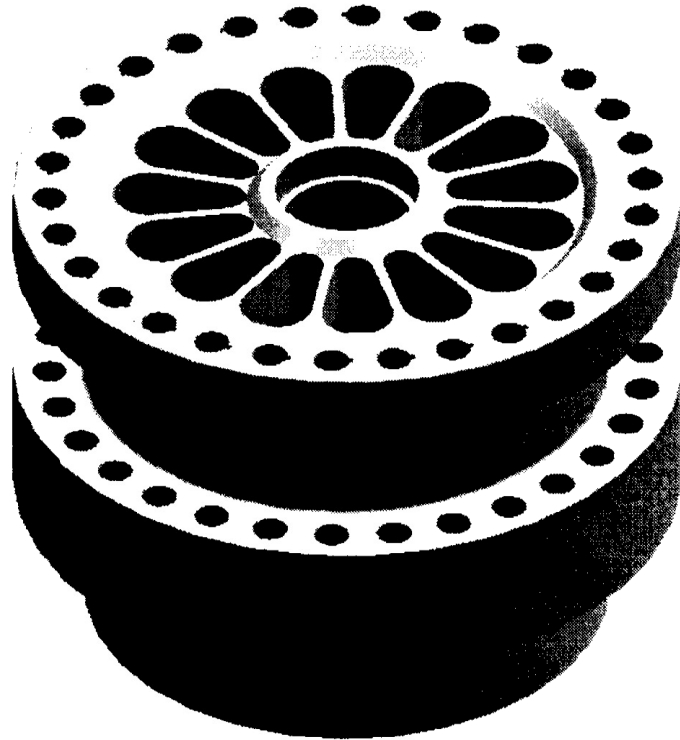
Turret with Key Way Guidance for Cylinder Shape Punches Design
